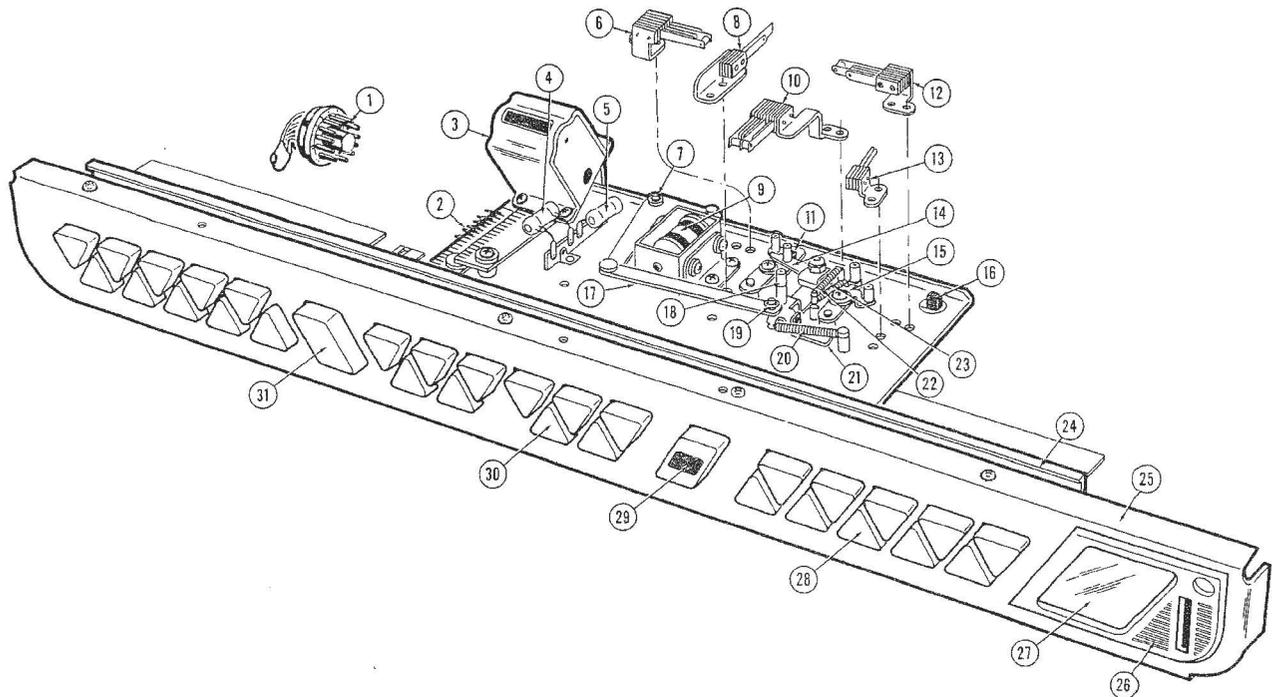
SELECTOR SWITCH ASSEMBLY, 2400-2400S
